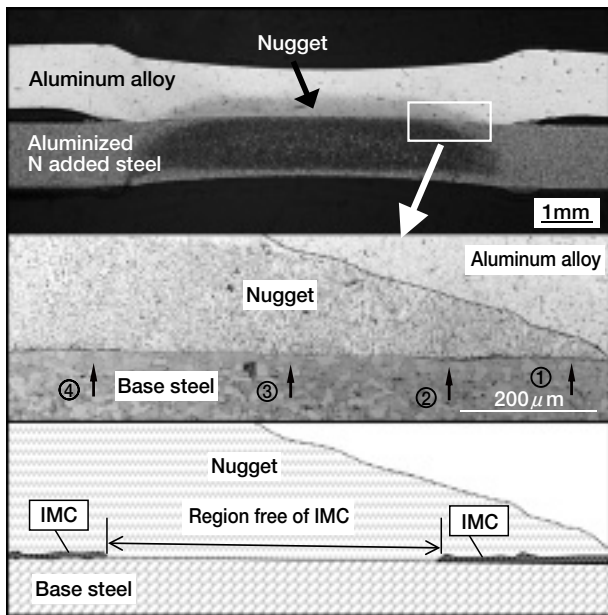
Cross-sectional structure of spot welding part of aluminum alloy to hot-dip aluminized N added steel sheet.
